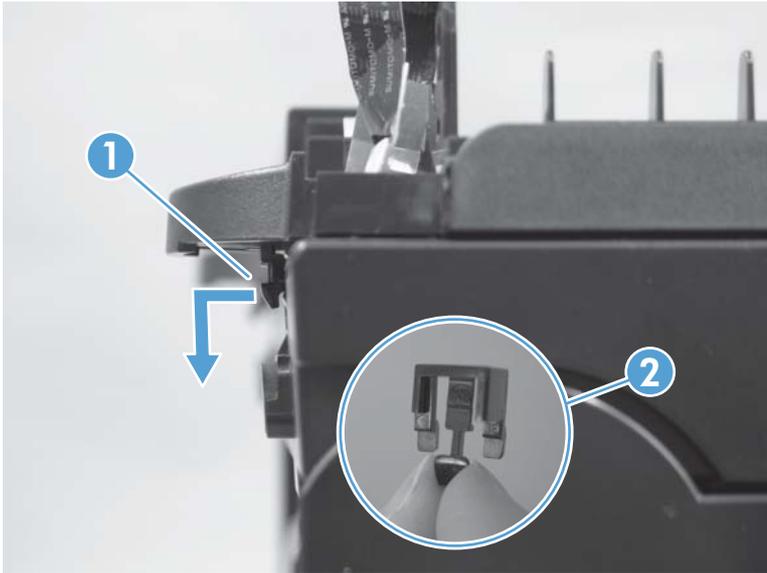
Remove the document feeder base assembly (1 of 3)
